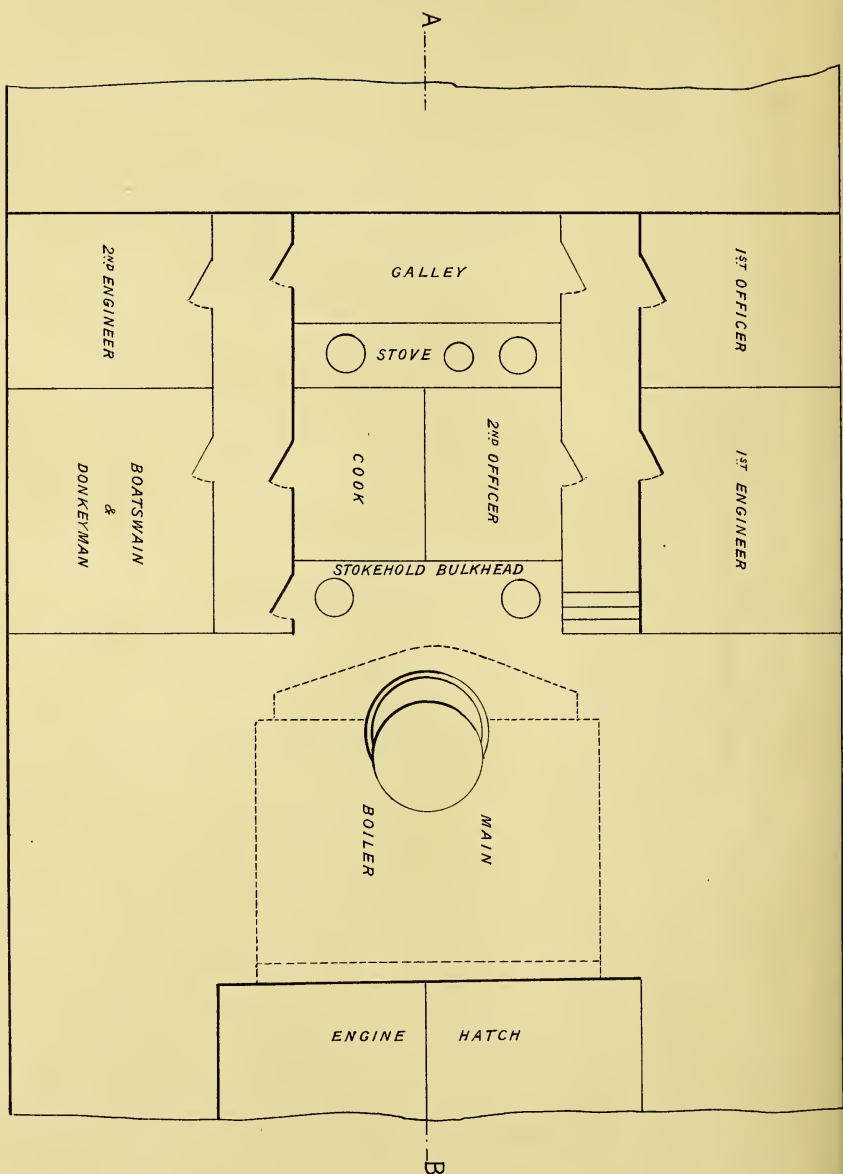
PLAN ON MAIN DECK SHOWING ARRANGEMENT OF BERTHS.
